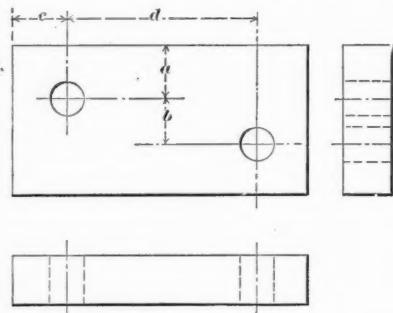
Simplest Form of Jig for Piece shown in Fig. 61.
